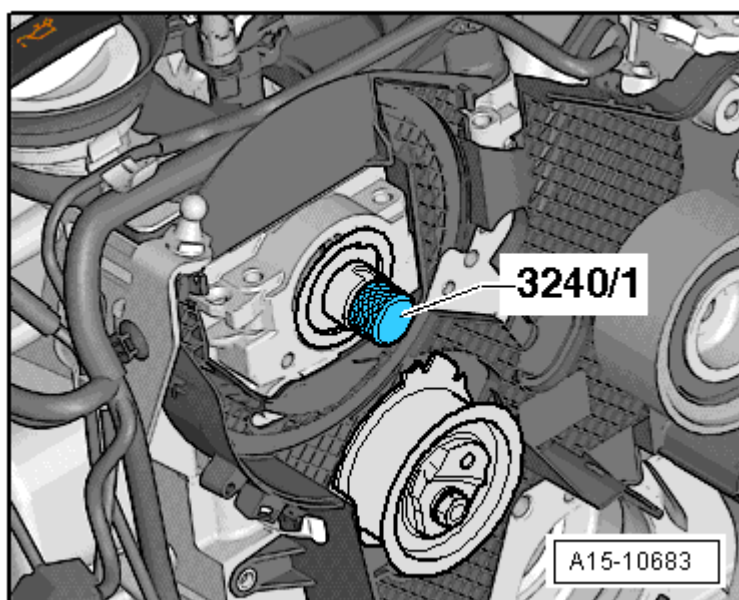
Identifying Thrust Piece 3240/1 Inserted In Camshaft
